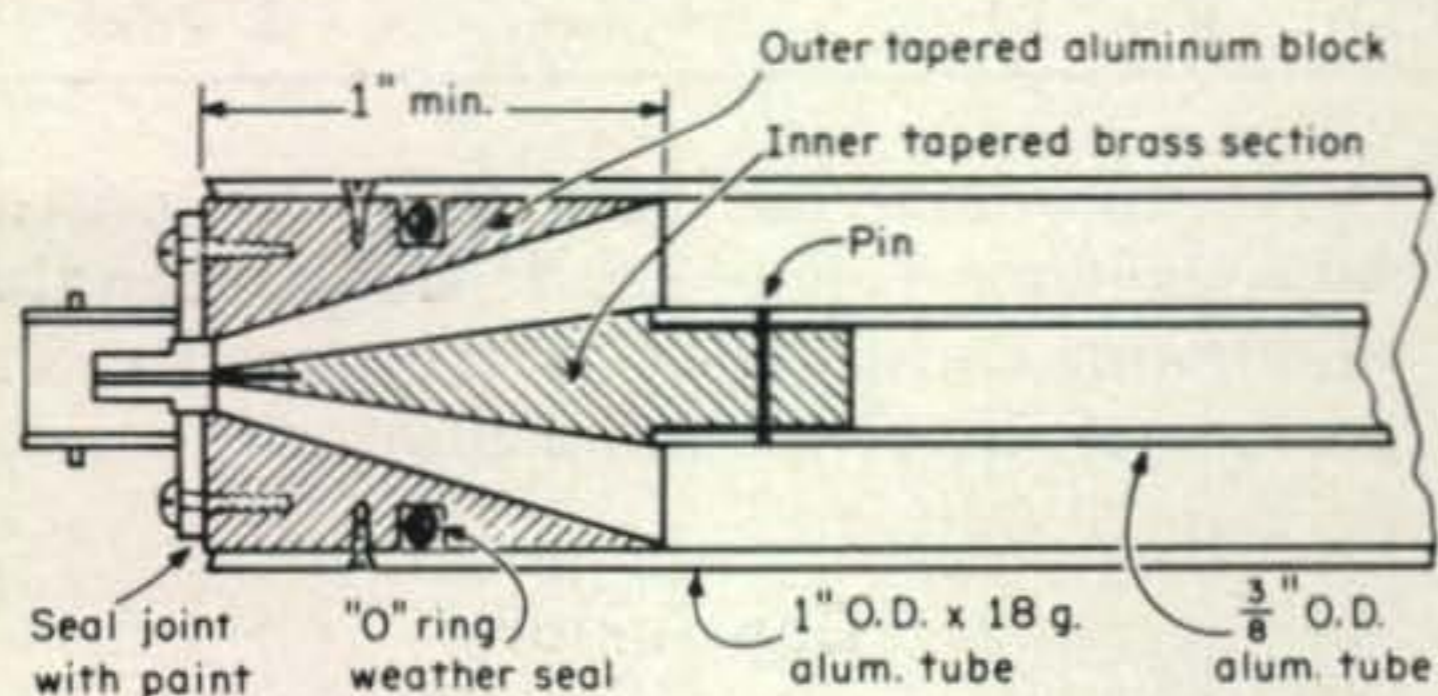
Assembly of BNC flange mounting to aluminum coaxial line.
